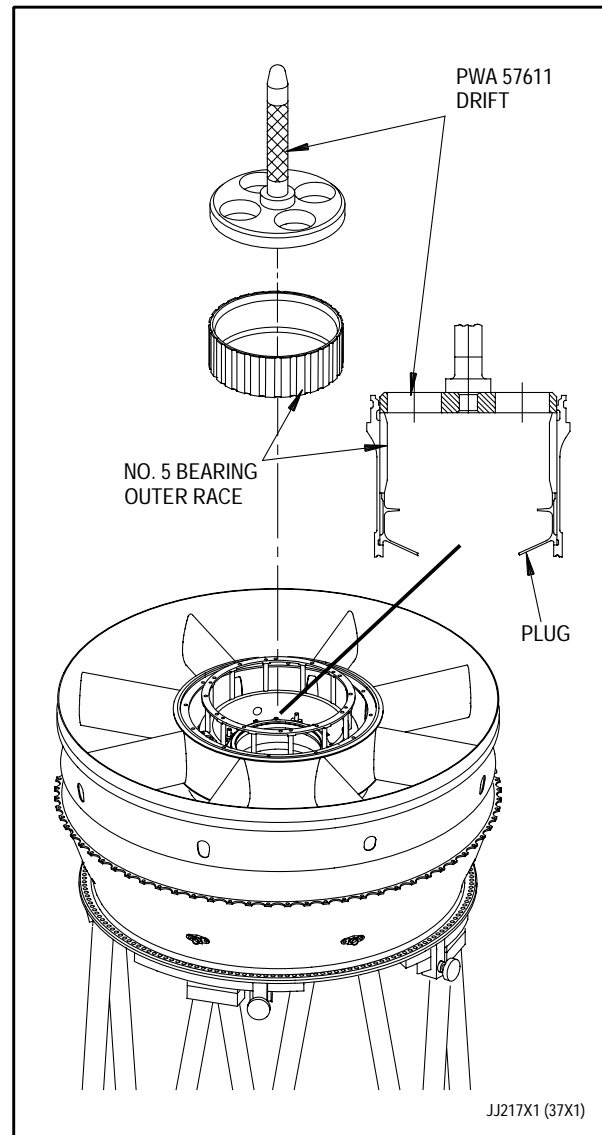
No. 5 Bearing Outer Race and Outer Race Retaining Nut - Installation (Sheet 2 of 4)
